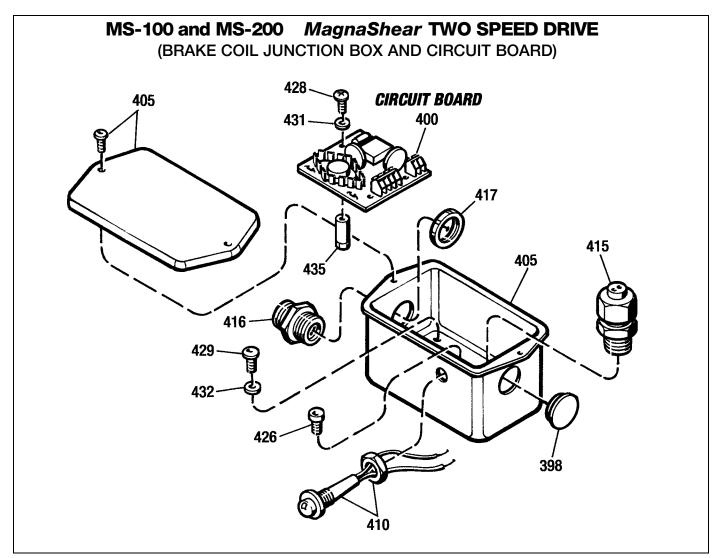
Repair Parts - Brake Coil Junction Box and Circuit Board
